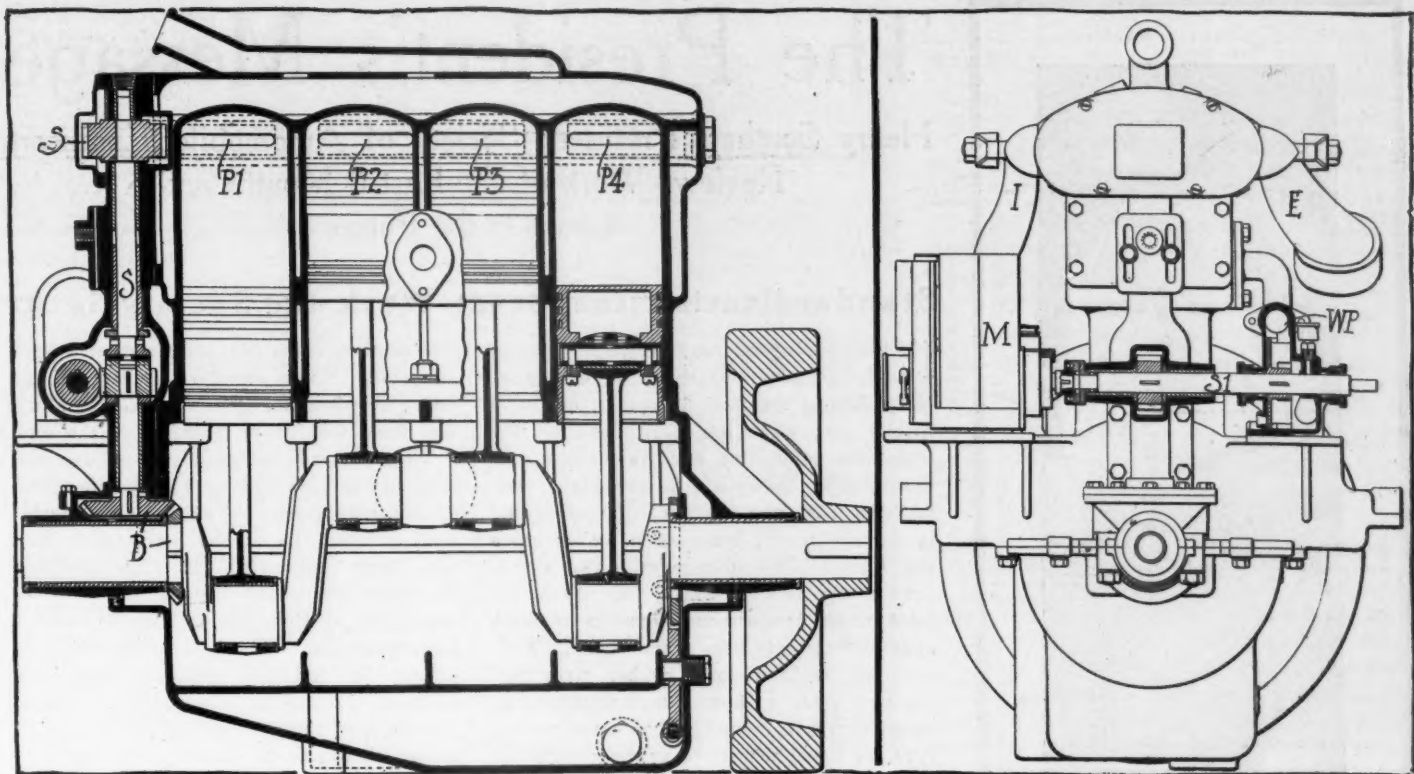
SIDE VERTICAL SECTION AND END ELEVATION OF MEAD MOTOR
